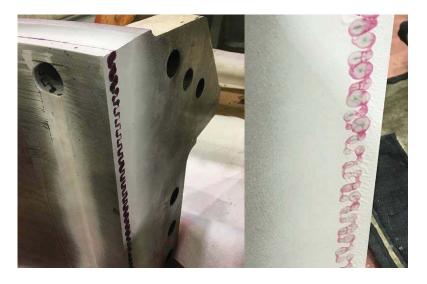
Turbine Guide Bearing, PT Section 1-3
